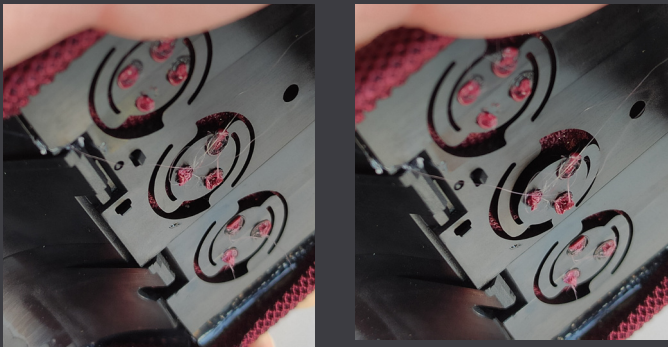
Inside surface of Fresh 'n Rebel Rockbox Bold S: latches that bend inwards when pressure is applied on top.
